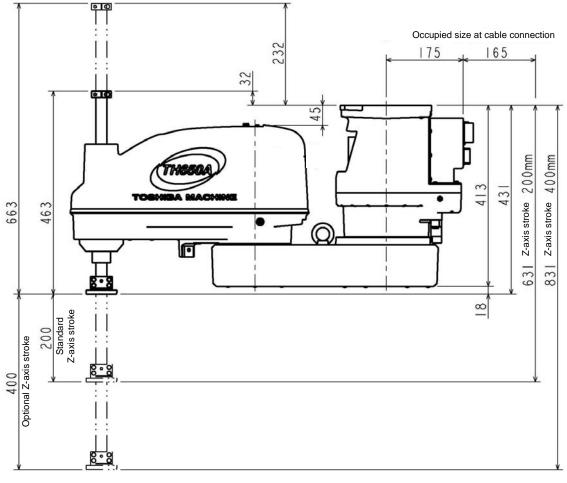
Outer dimensions of the robot (TH650A-T)
